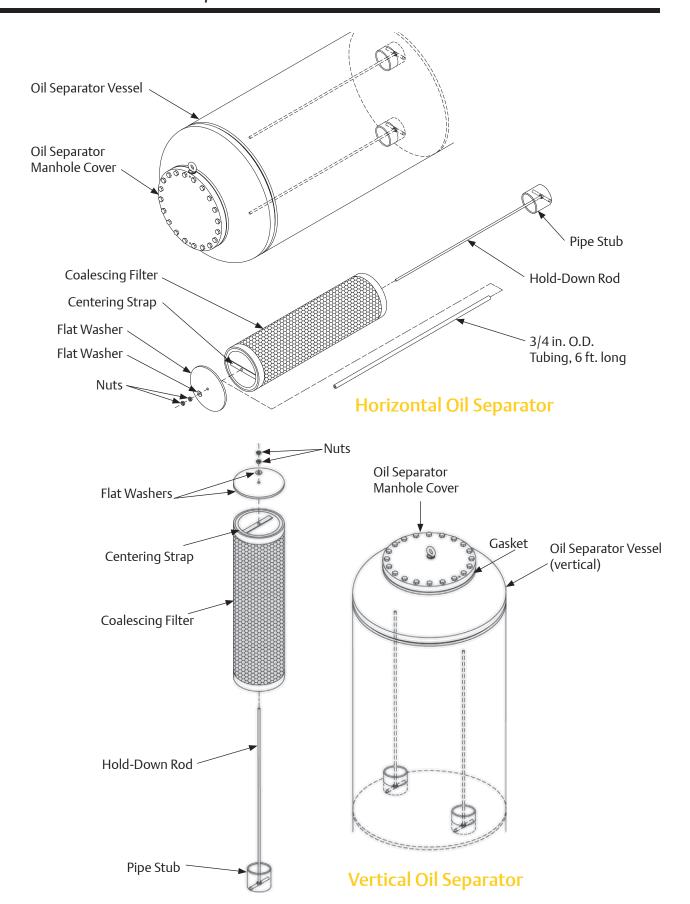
Oil Separators, Manhole Covers and Coalescing Filter Assemblies
